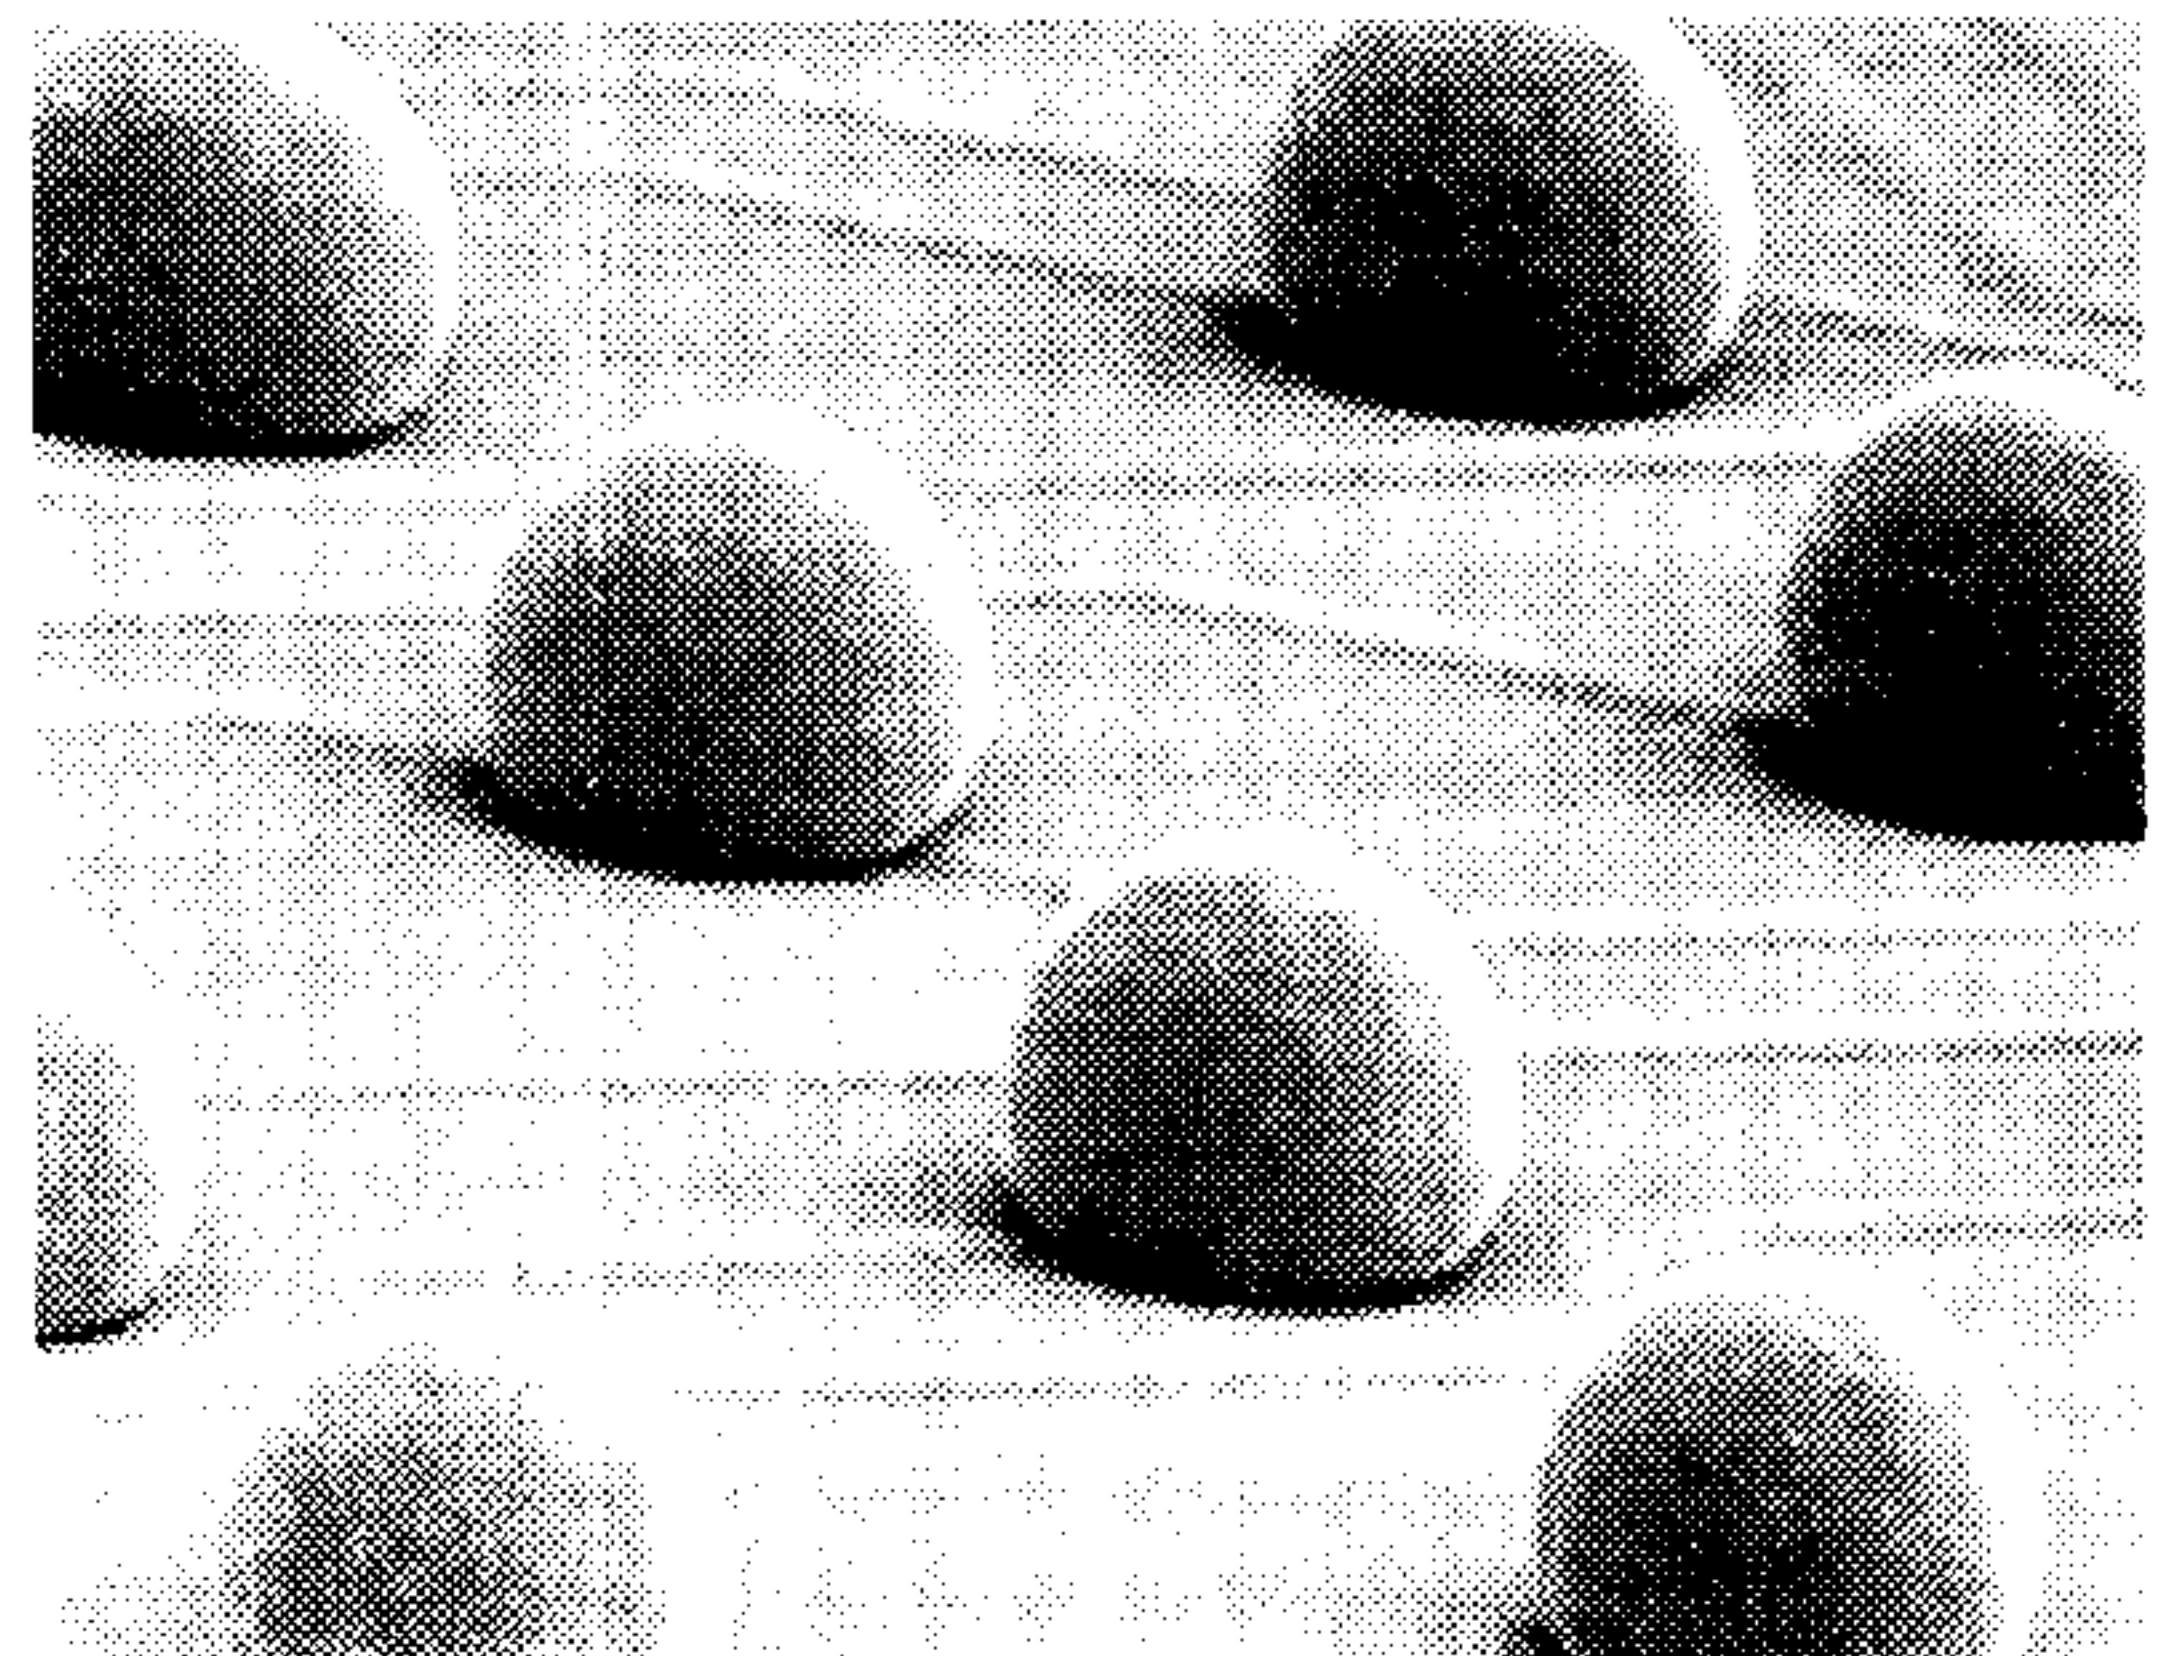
Solder bumps deployed over the active area of the chip.
